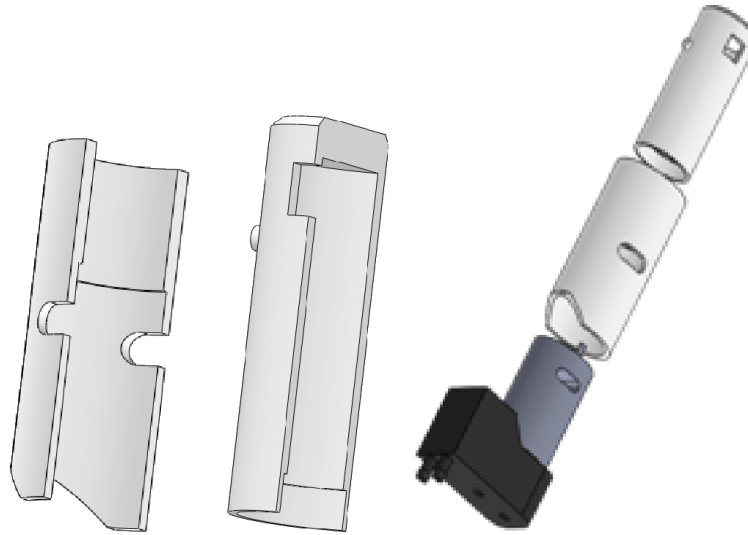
(right): Assembly model of the full seeding mechanism/tool with the tool shaft attached.
